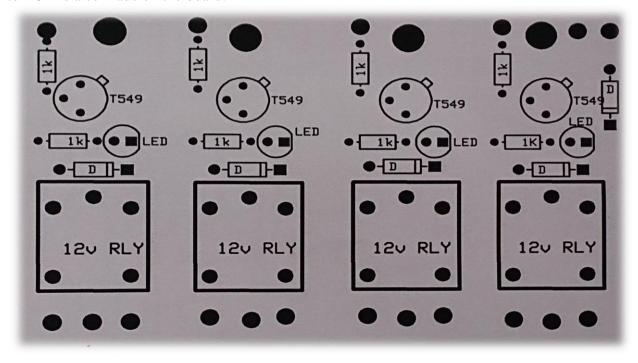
PCB LAYOUT FOR PIC 18, POWER SUPPLY AND INTERFACES
